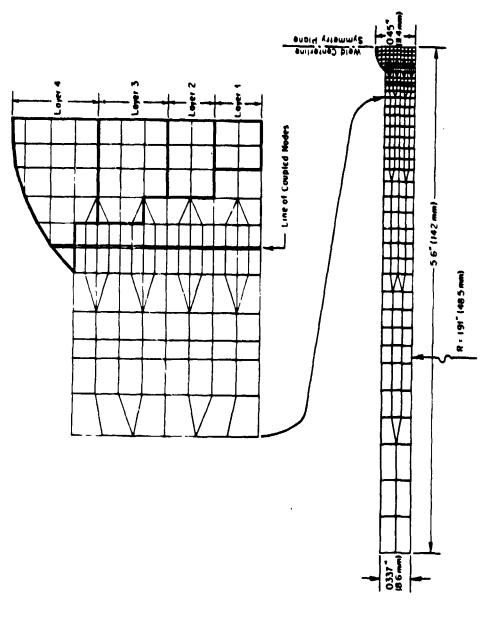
CROSS SECTION OF AN 18-PASS BUTT WELD IN AN HY-80 STEEL SHIP STRUCTURE
